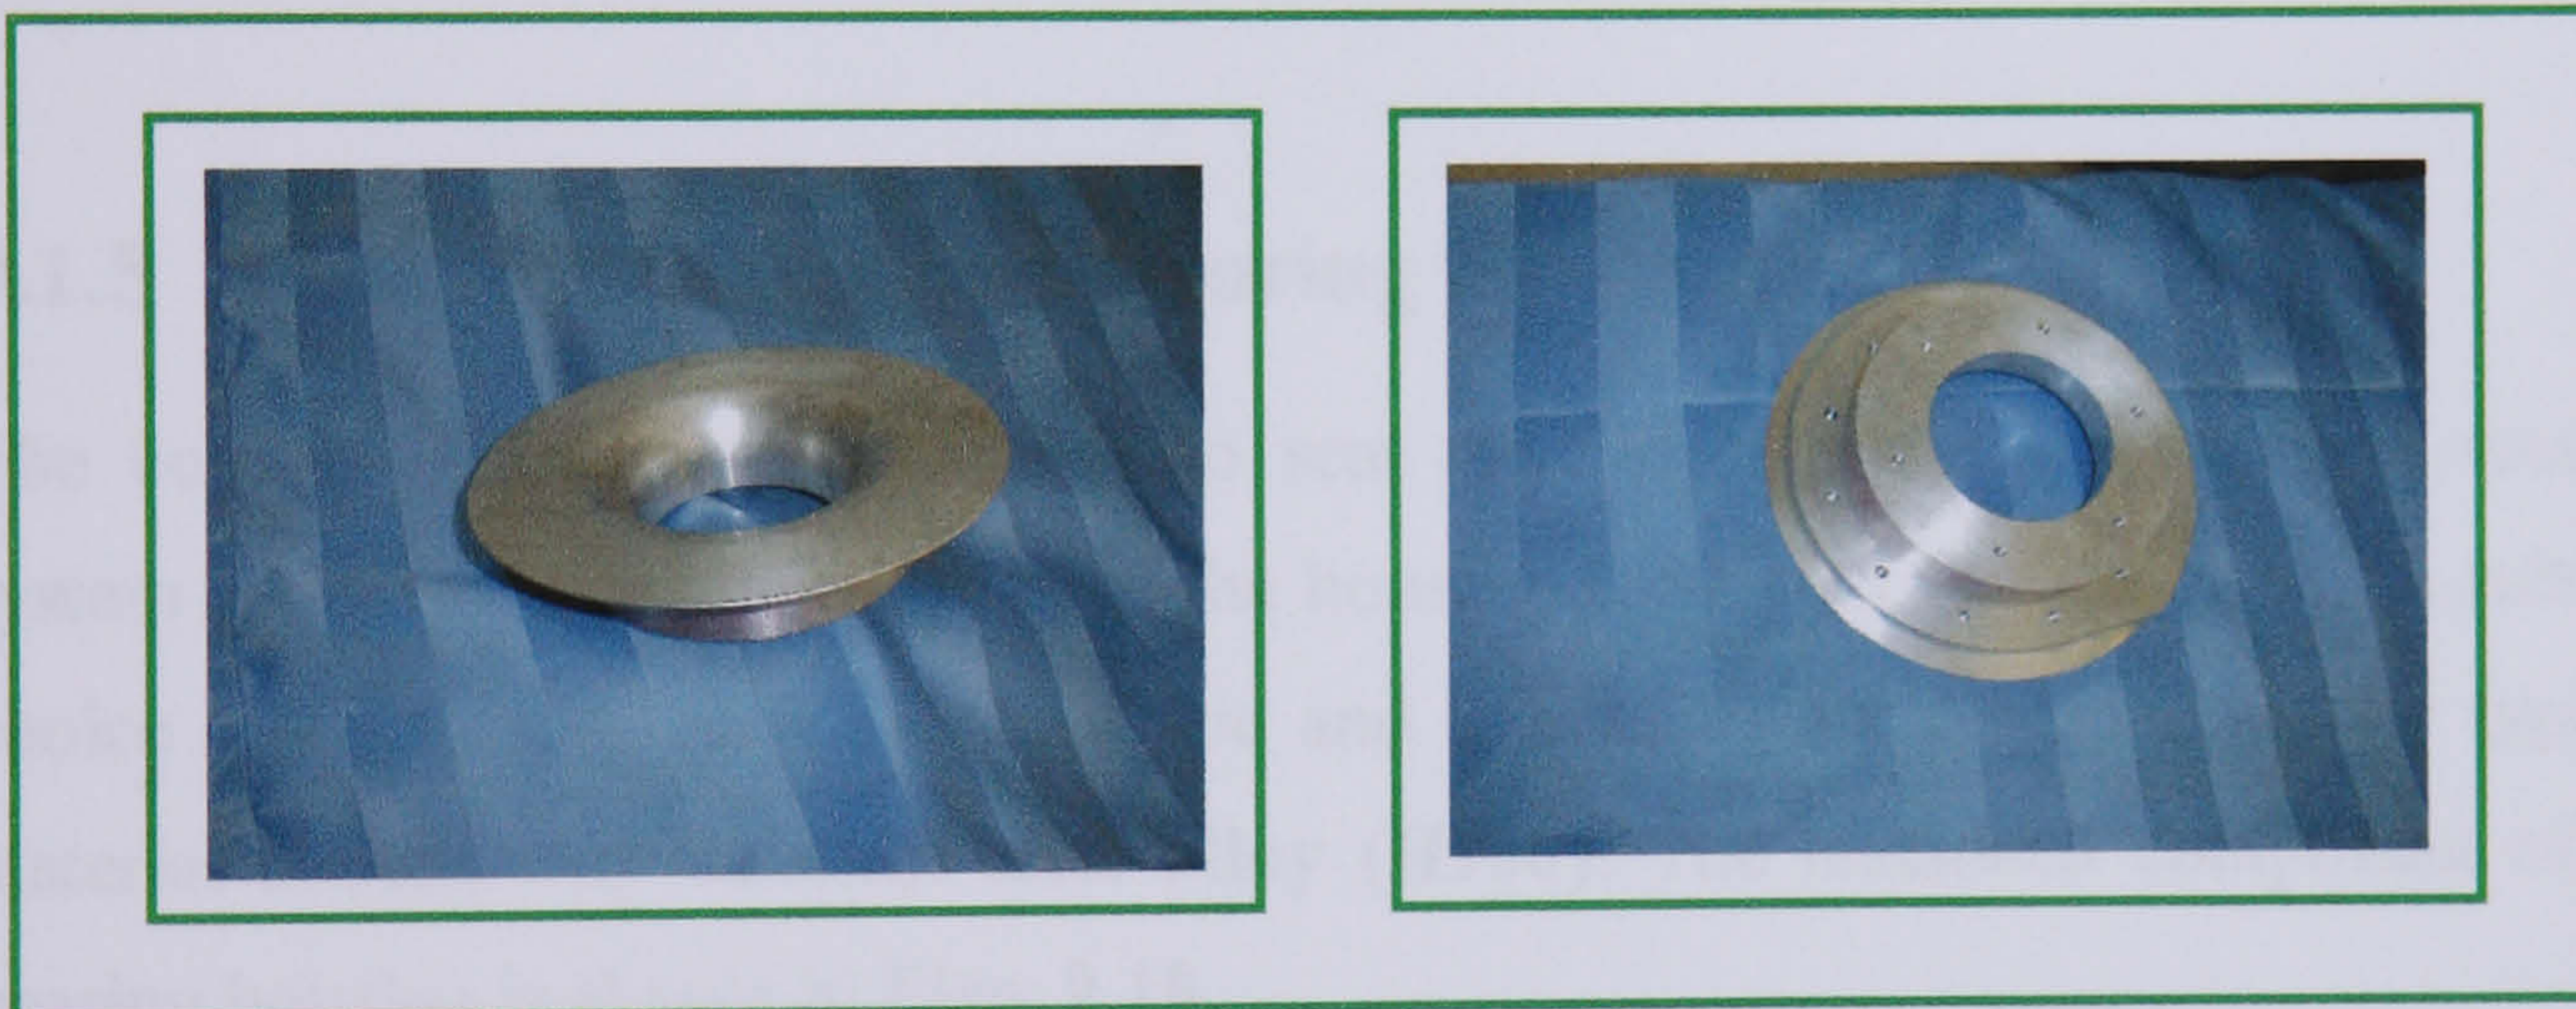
VANELESS DIFFUSER MACHINED FROM ALUMINUM ALLOY-7075
